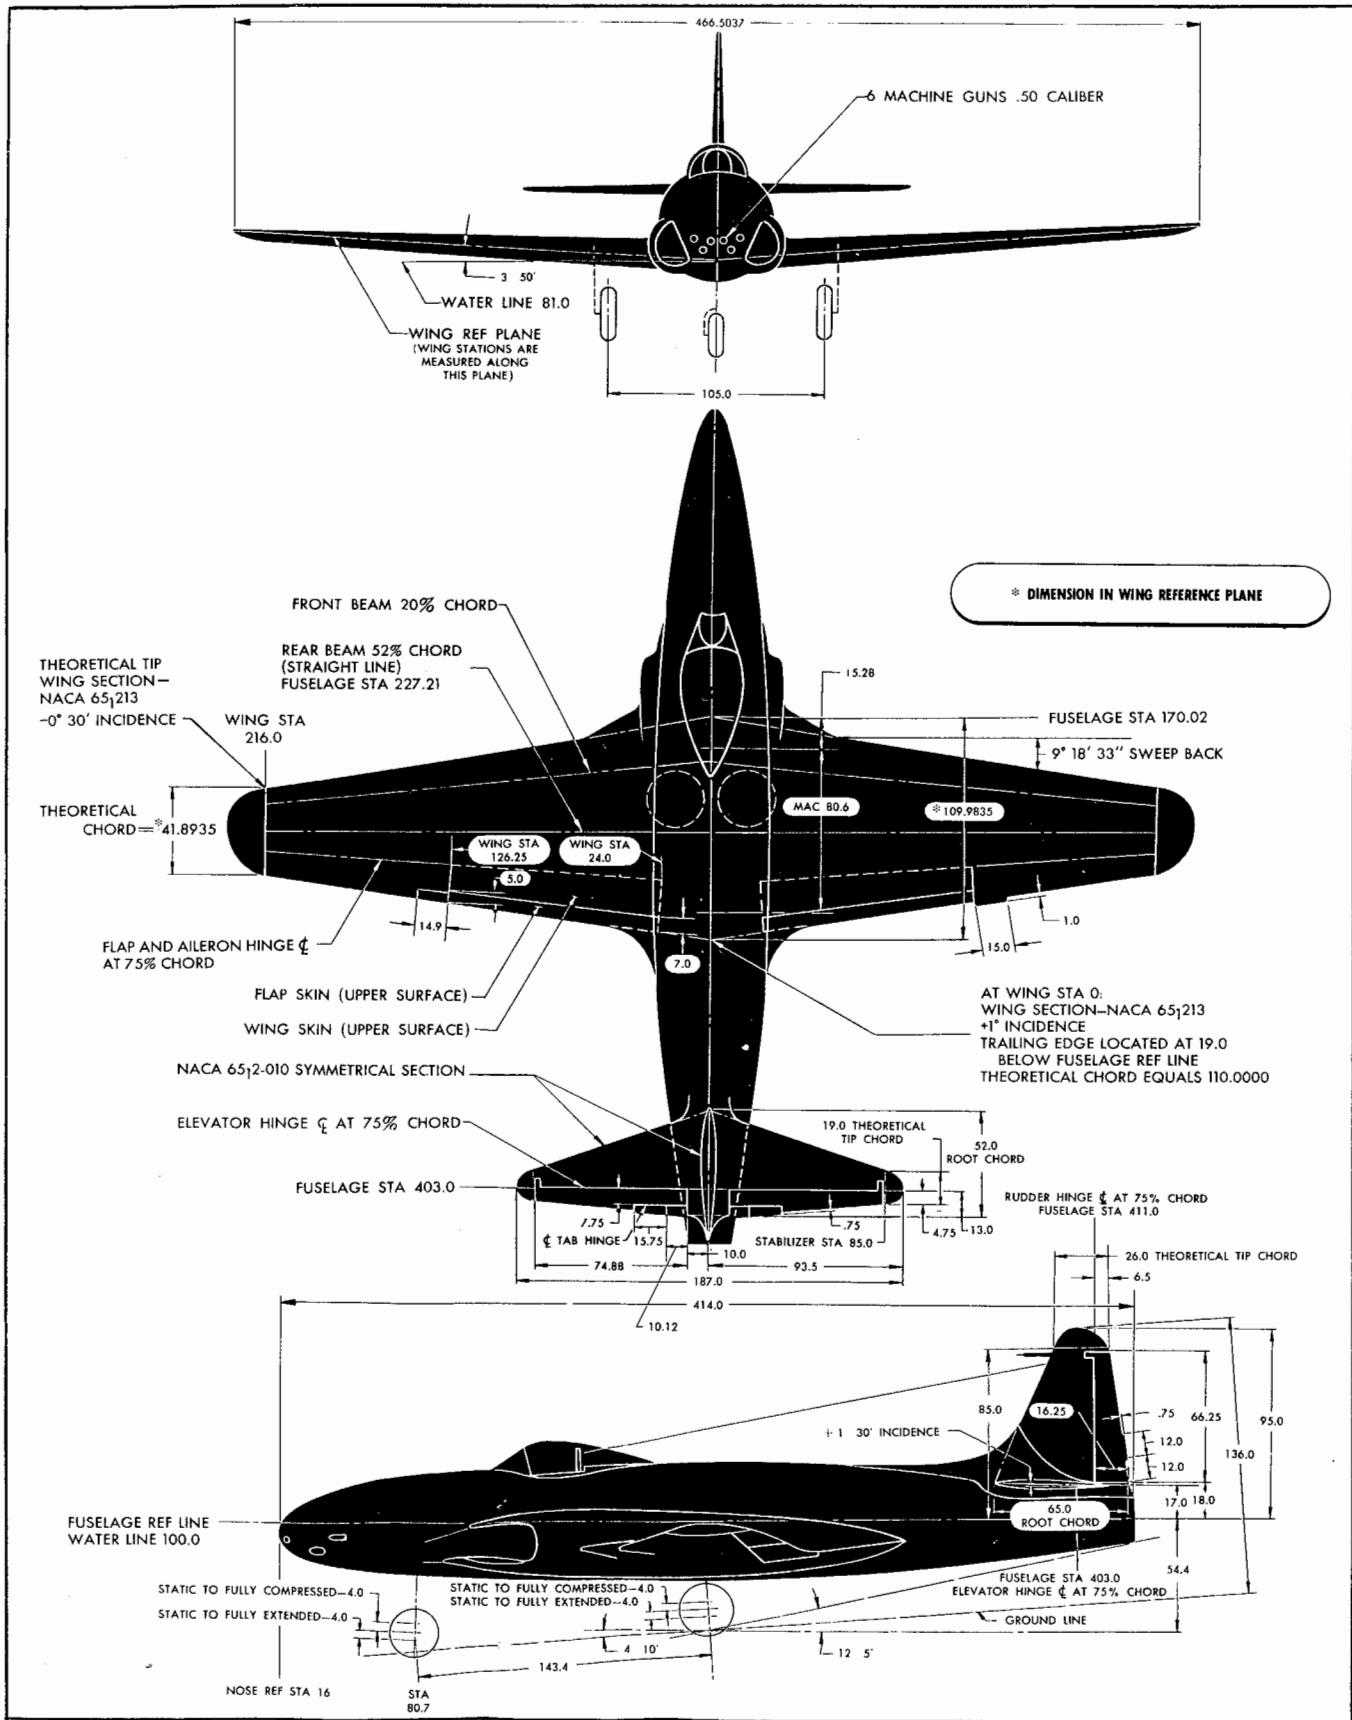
Principal Dimensions, P-80A, P-80B, and P-80C Airplanes
